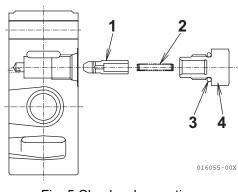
Check valve section (Bucket Section for Combined Oil)
